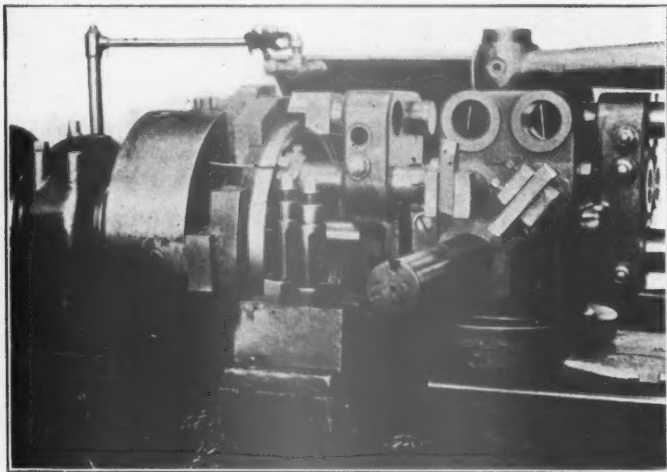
Turning and Boring One Valve Packing Ring on First Semi-Automatic Machine
